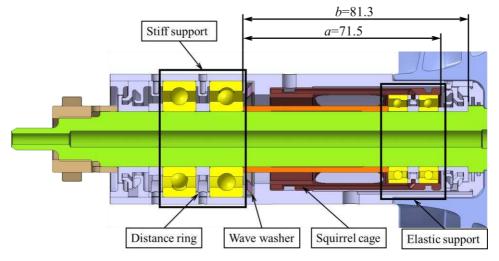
Bearing assembly of jet engine with one stiff and one elastic support
